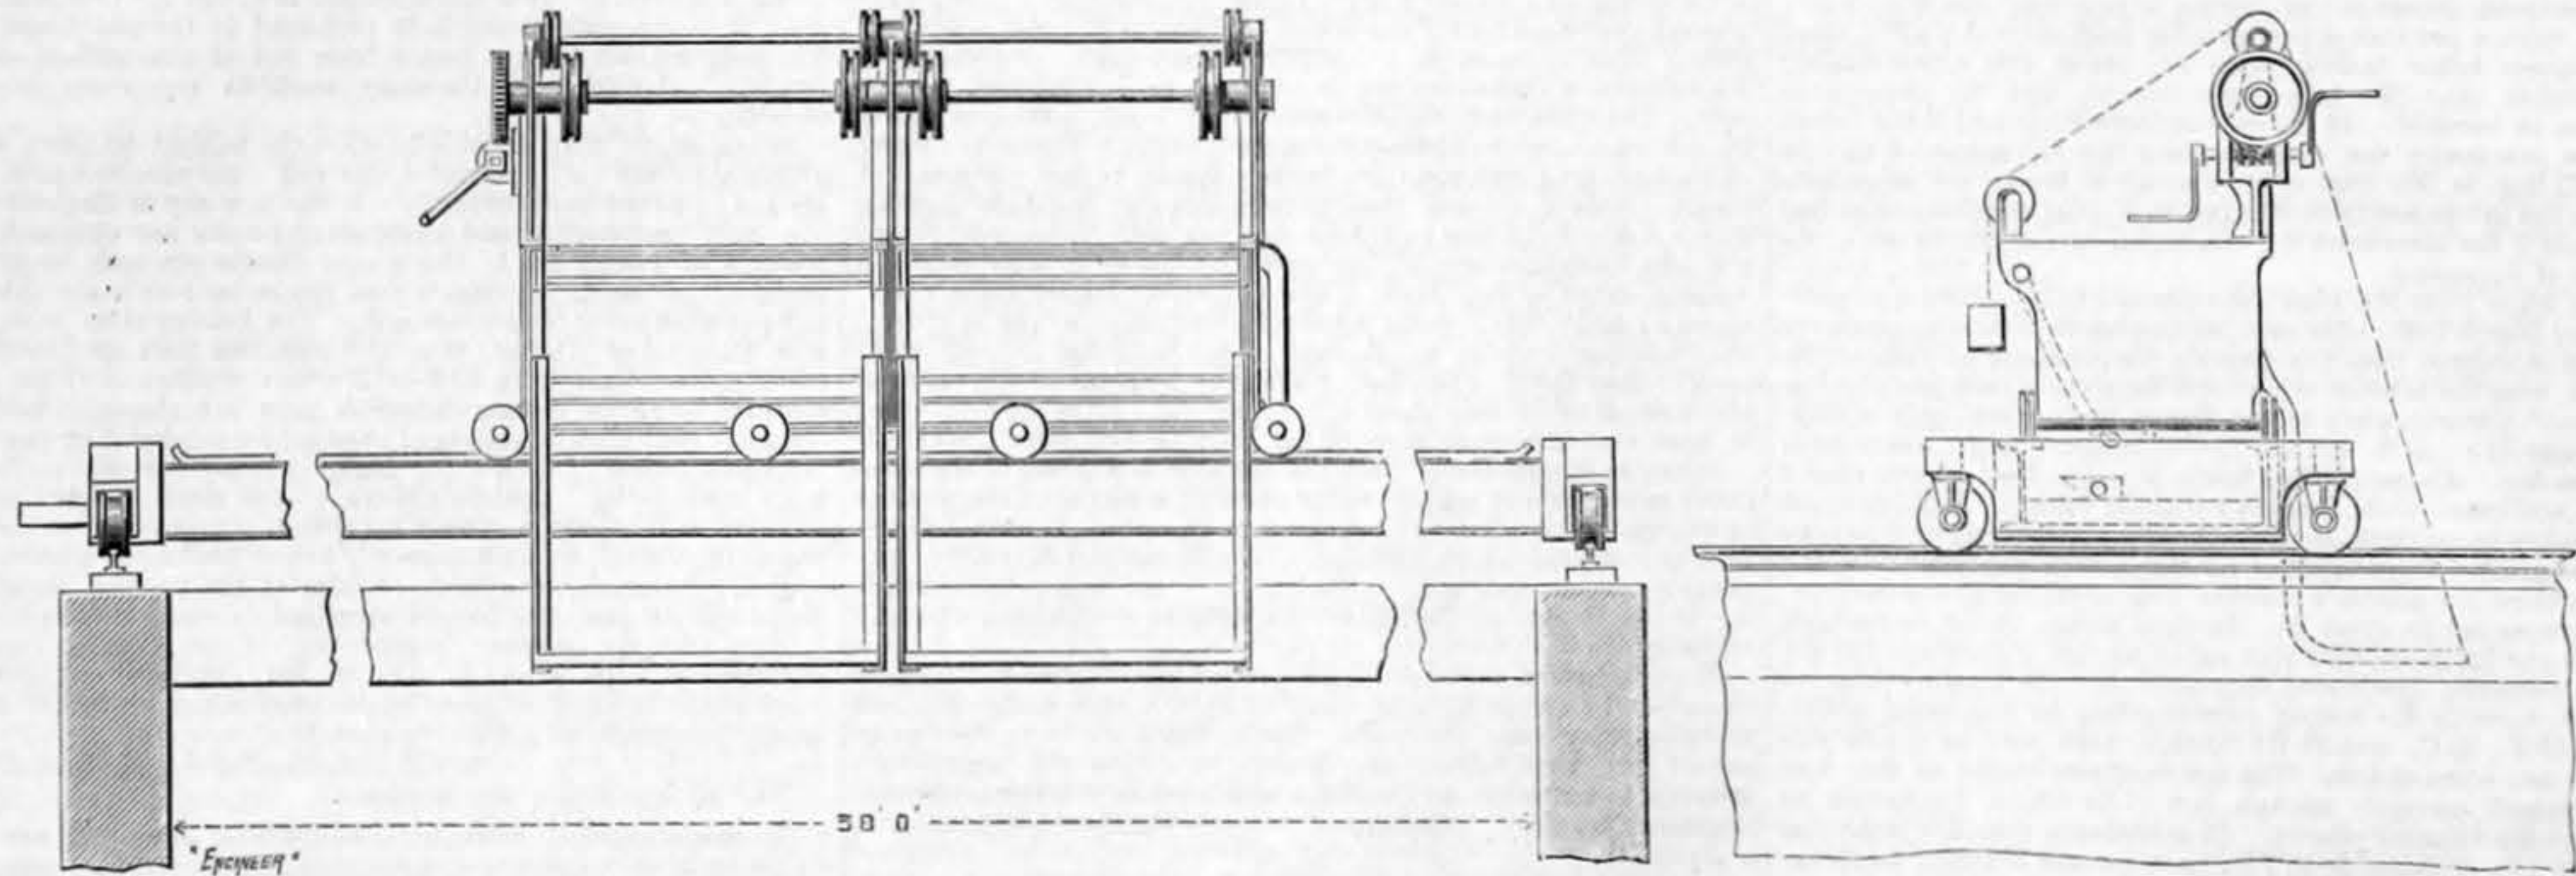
SAND-WASHING MACHINERY, GLASGOW SEWAGE WORKS
